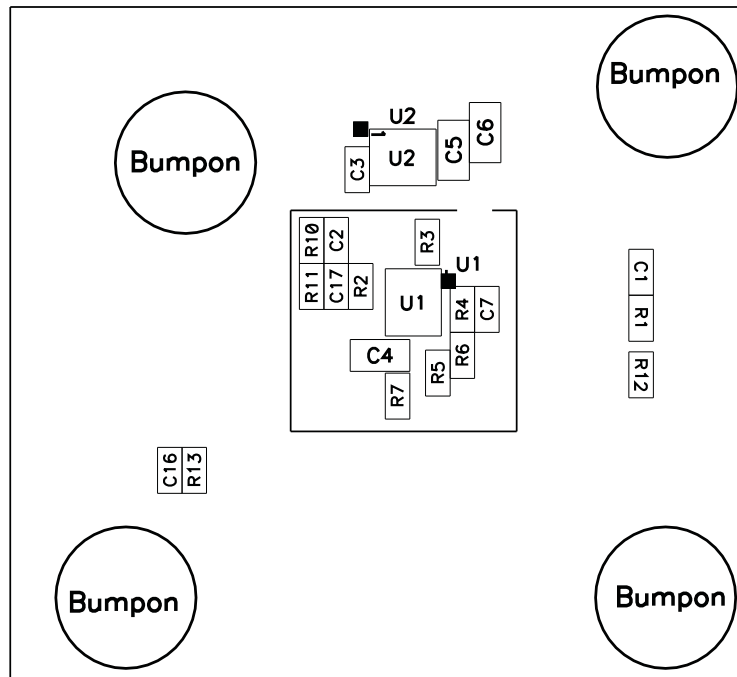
TPS51218EVM Bottom Assembly Drawing, Bottom View
